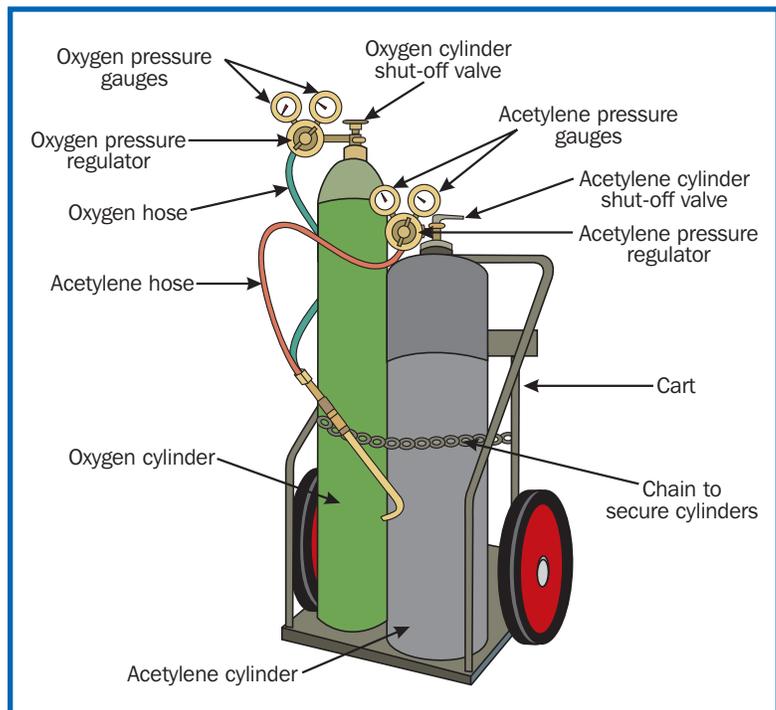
Major parts of an oxyacetylene welding and cutting outfit.
